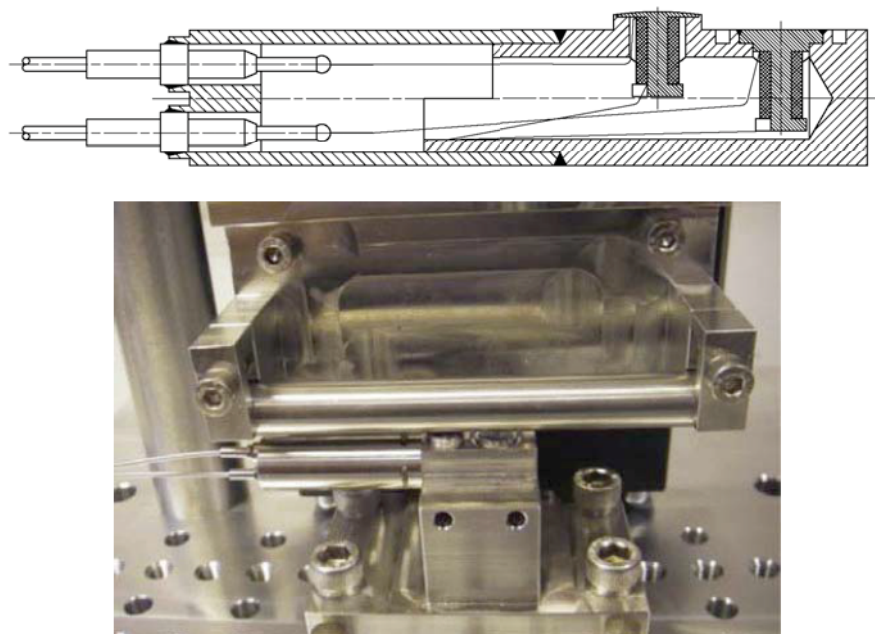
Oxide thickness probe: schematic drawing and test setup of probe with zircaloy test tube.⁷⁸
